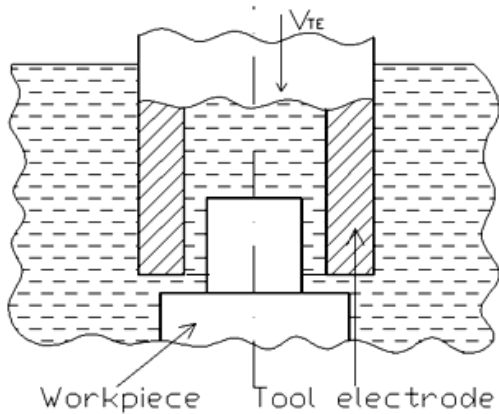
Obtaining external cylindrical surfaces by means of a tubular tool electrode
